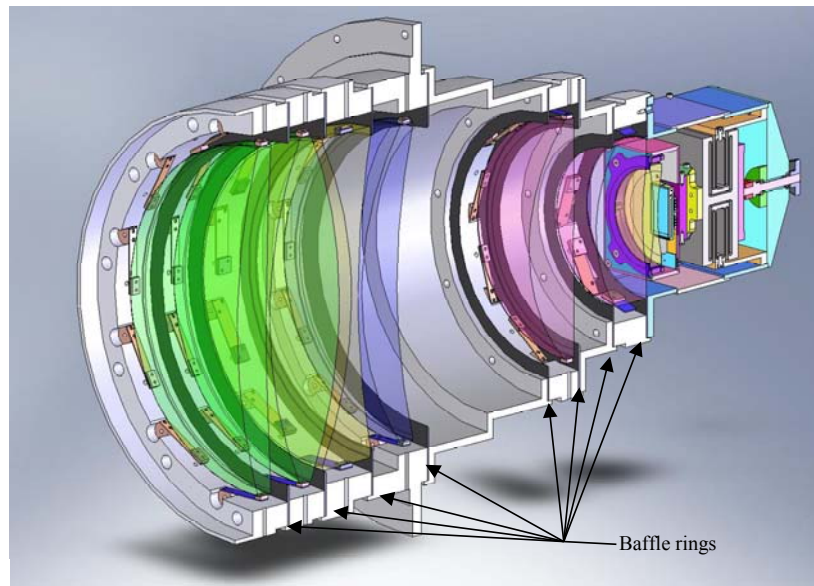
Section View Showing Camera Barrel Assembly Light Baffles
